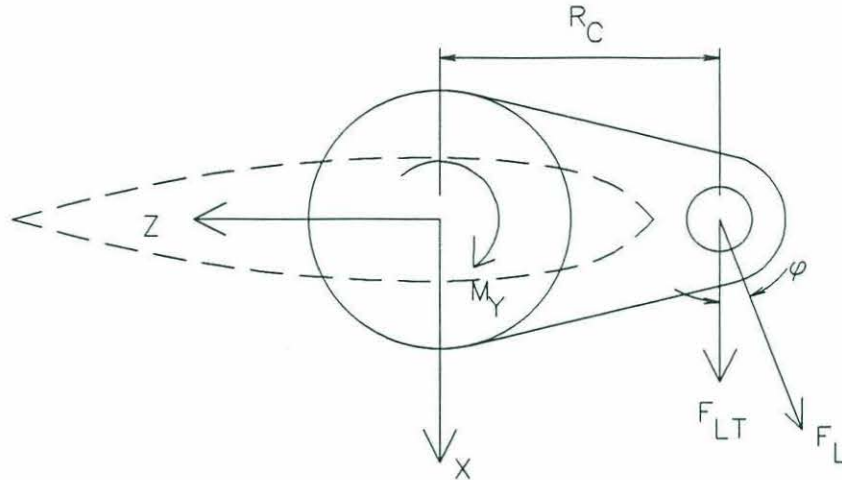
End-on view of propeller spindle shaft looking toward the hub. The crank ear is shown at right.
